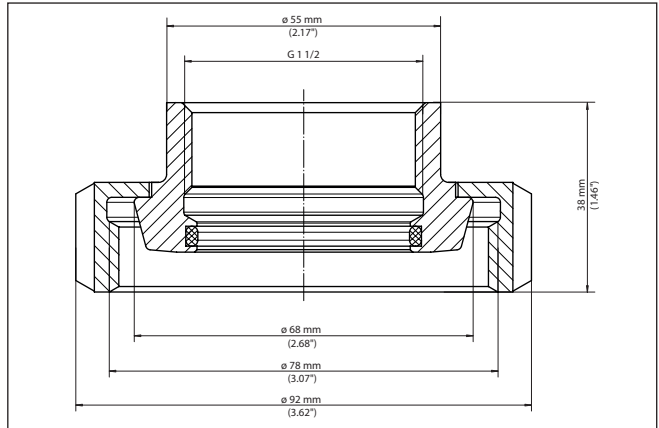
Dimensions of threaded adapter G1½ (DIN 3852-X) on slotted nut DN 50 (DIN 11851) PN 16
